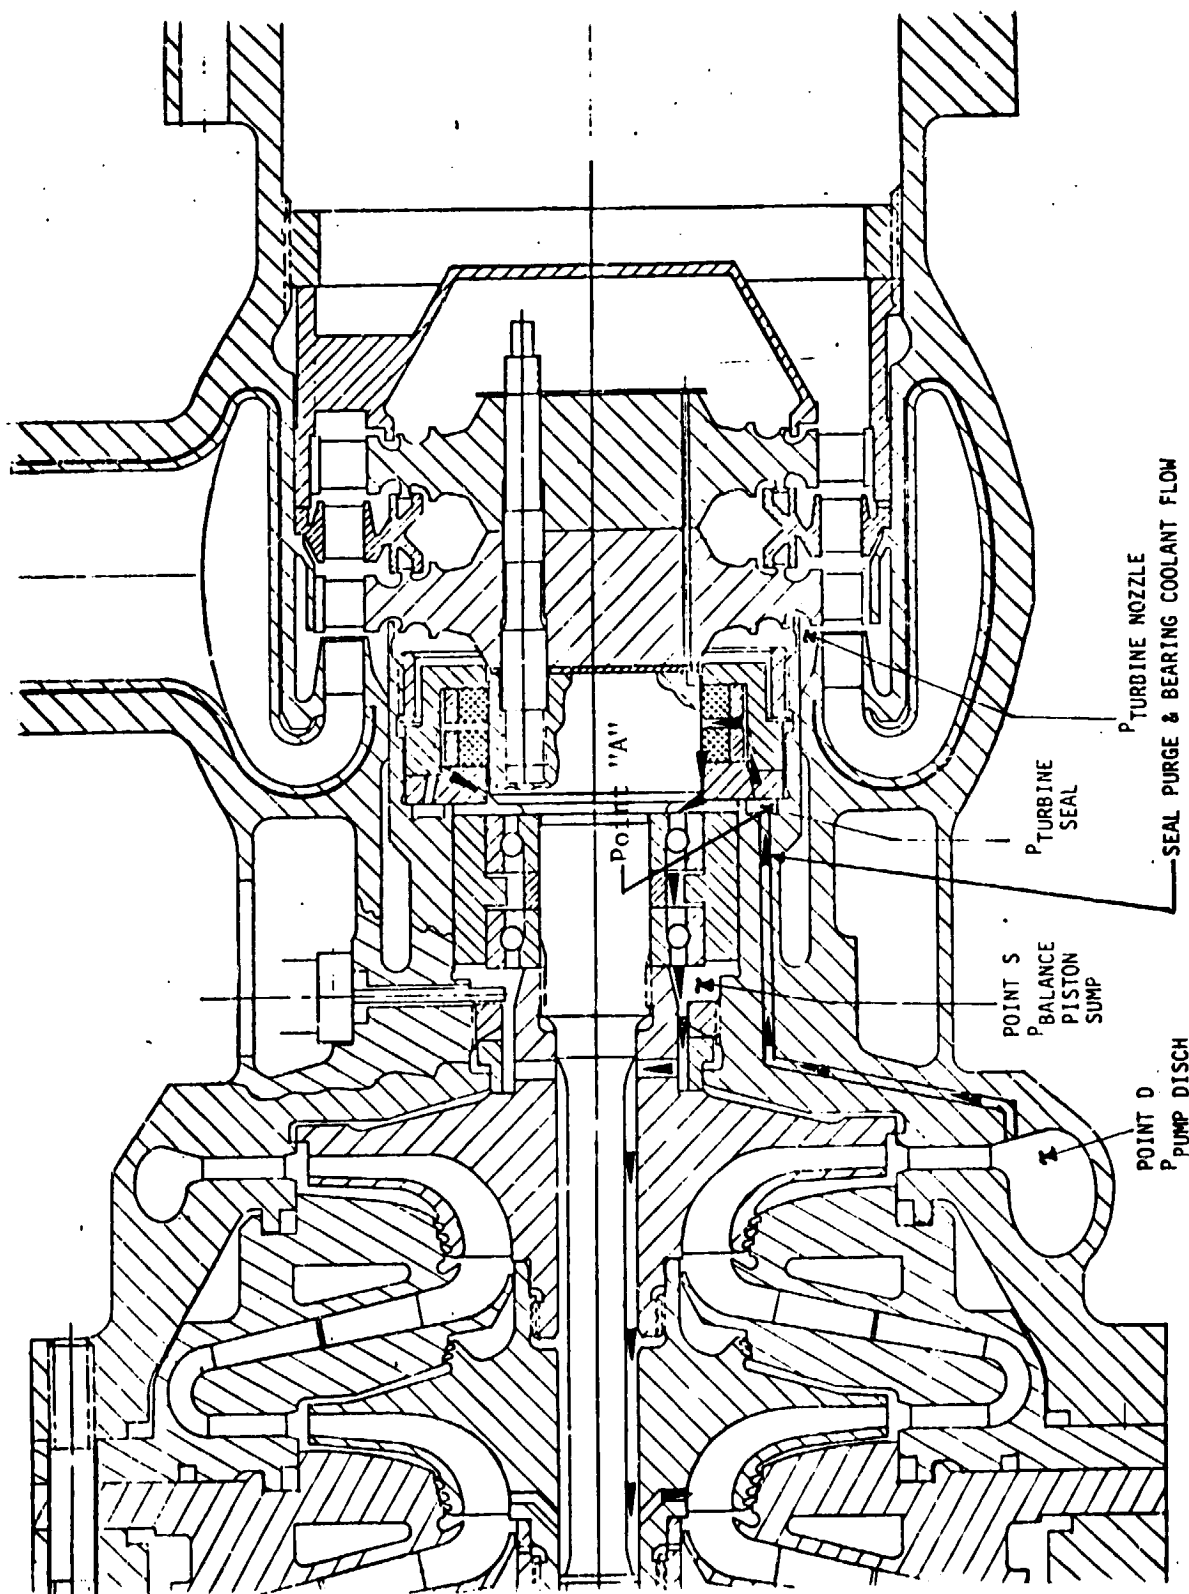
Mark 48-F Rear Bearing Coolant Loop
